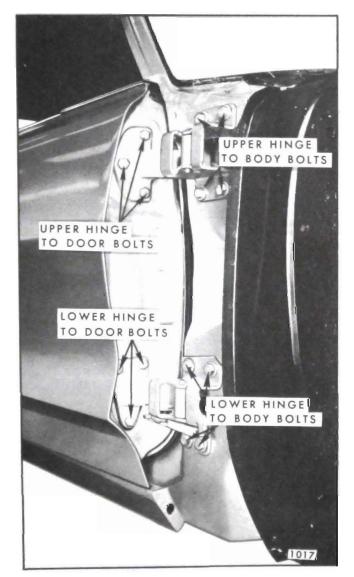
Front Door Hinge Attachment -''B-C and E'' Styles
